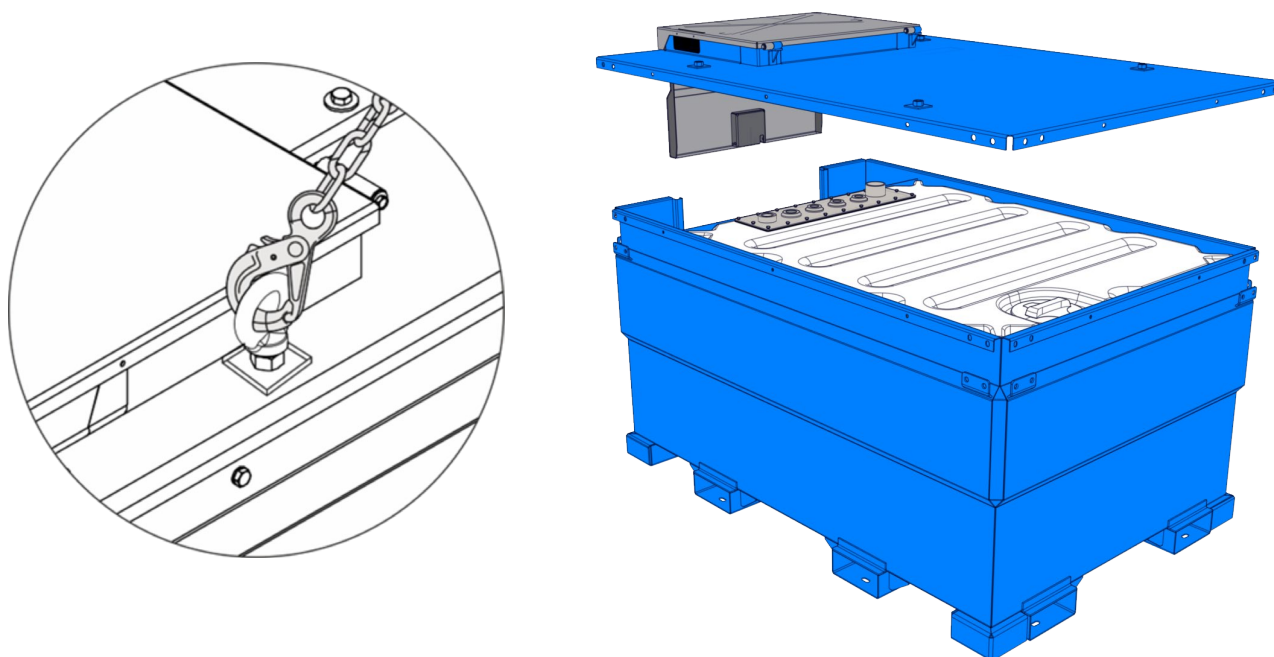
Step 3 (Inner Tank Removal DEF550 / 22DEF)
